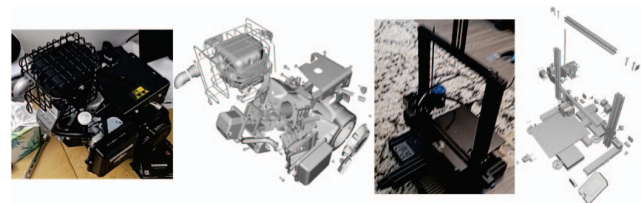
Images and exploded assemblies of the engine (left) and 3D printer (right) test objects.
